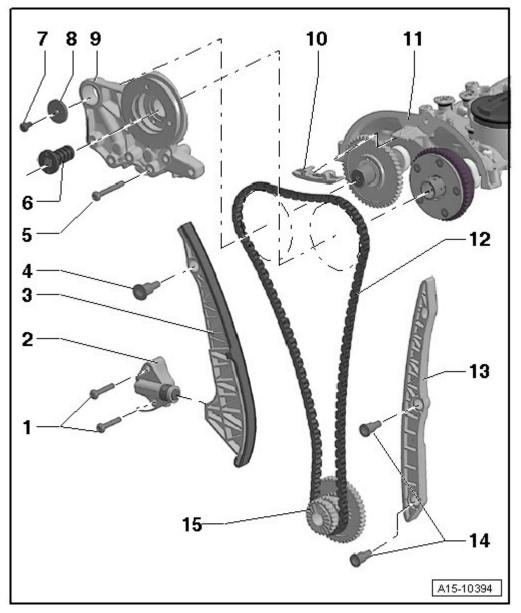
Identifying Assembly Overview: Camshaft Timing Chain Courtesy of VOLKSWAGEN UNITED STATES, INC.
